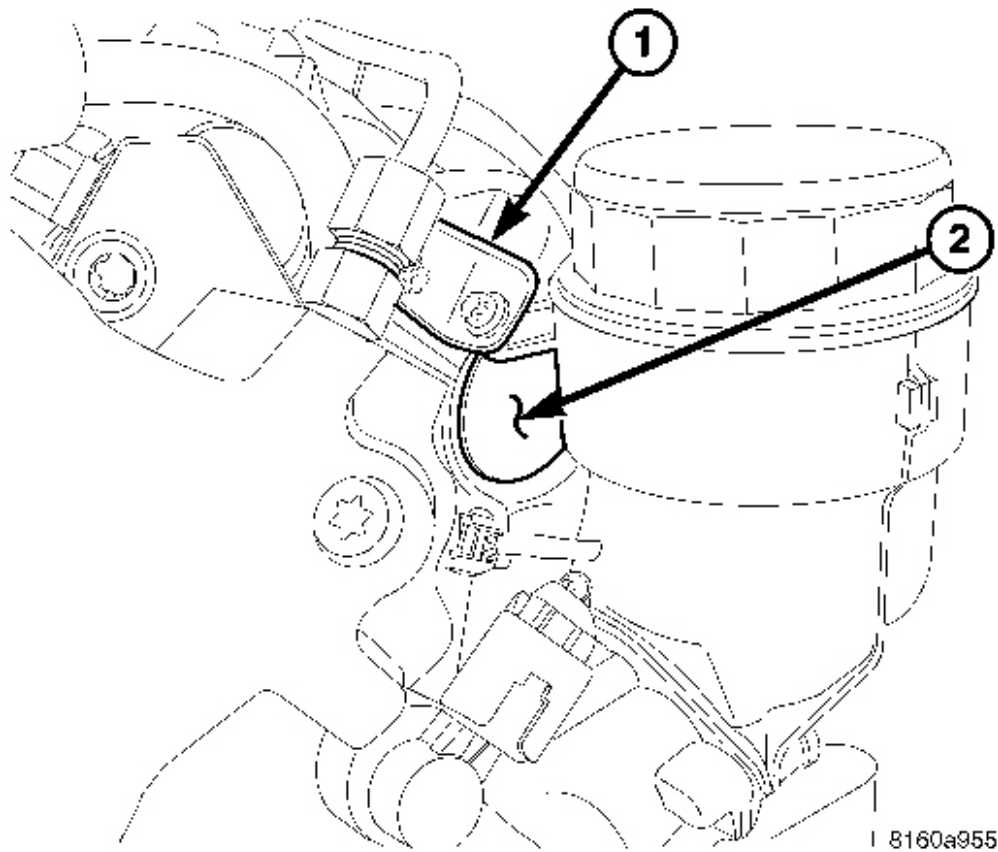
Left Front Camshaft Oil Seal & Oil Filter Housing Bracket
